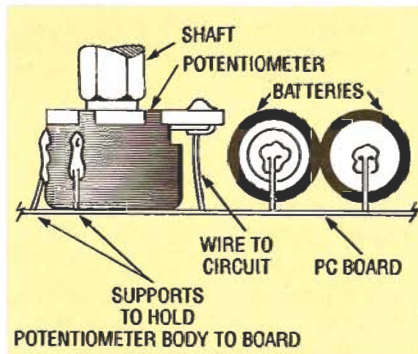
YOU MUST USE PIECES of bus wire to attach potentiometers R4 and R6 securely to the PC board.
